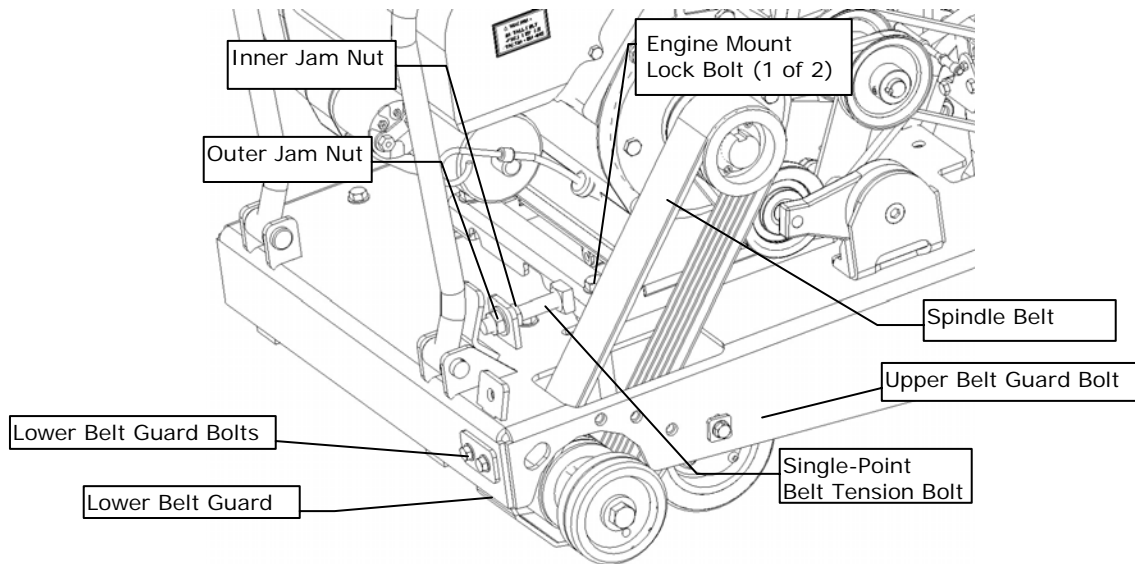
Spindle Drive Belt Adjustment & Replacement
